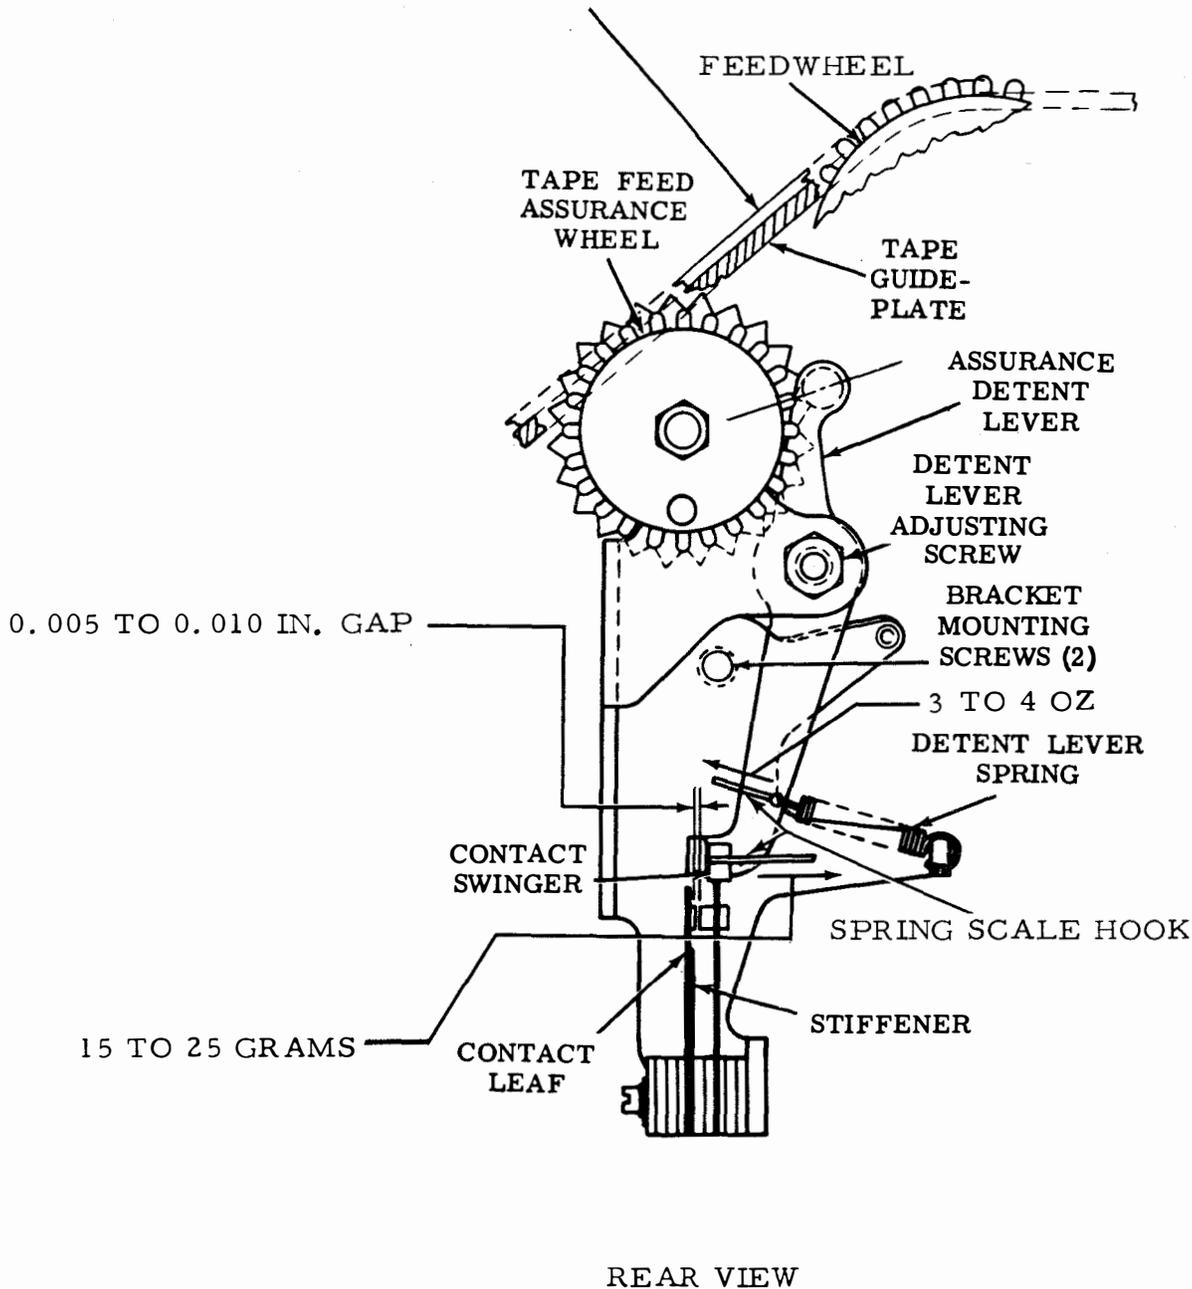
Tape Sensing Feedwheel Phasing, Tape Motion Contact Gap, Tape Motion Contact Swinger, and Detent Lever Spring
